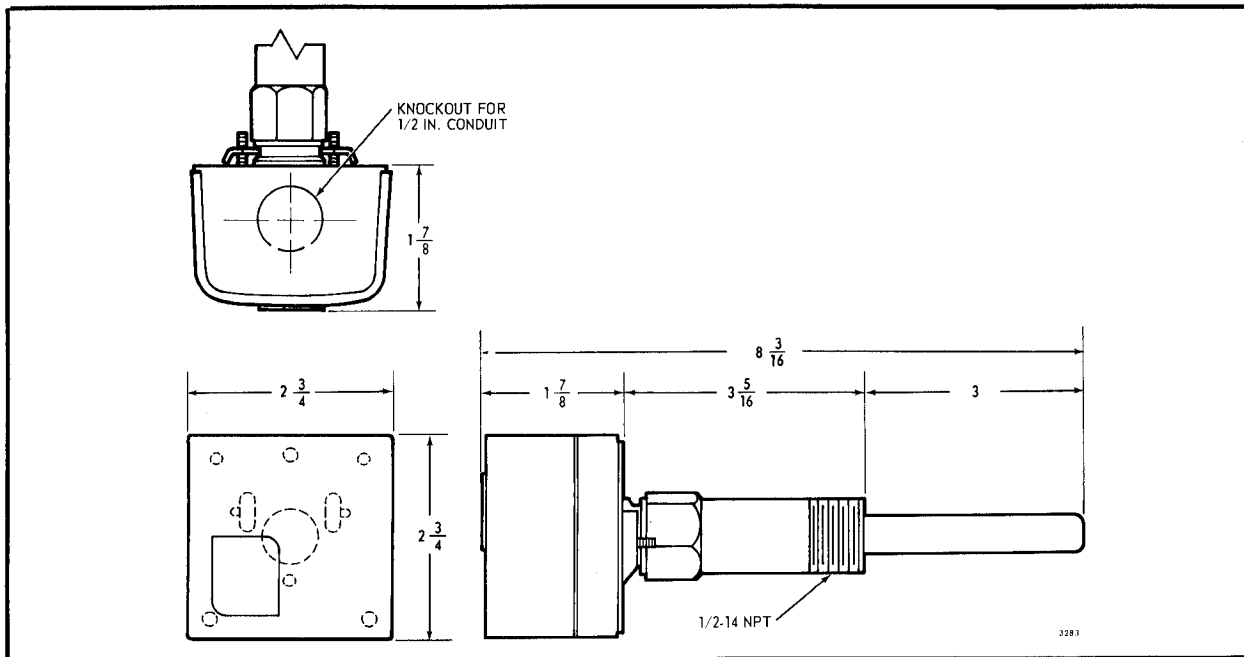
C7043A DIMENSIONS (IN INCHES).
